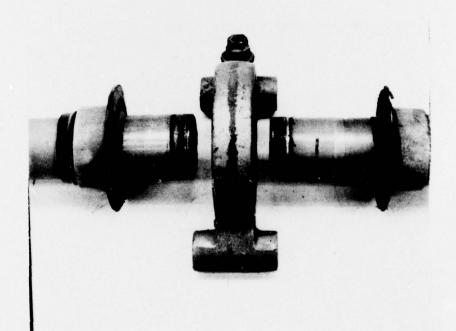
Bearing S/N TRL-31. Removed Position 5 With 42.5 Hours Time. Shown as Removed From Tester.
